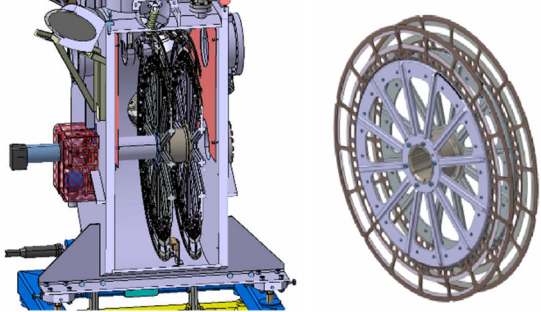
S3 Vacuum chamber assembly with wheel [7].
